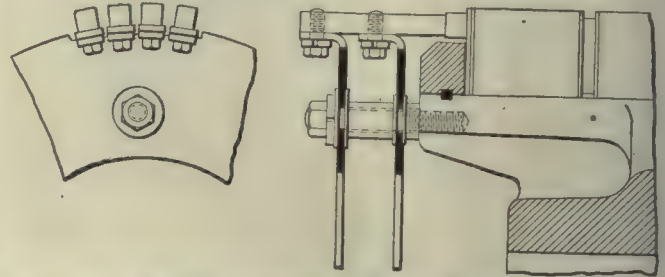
PARTIAL VIEW OF SECONDARY WINDING, SHEET-METAL RINGS BOLTED ON
